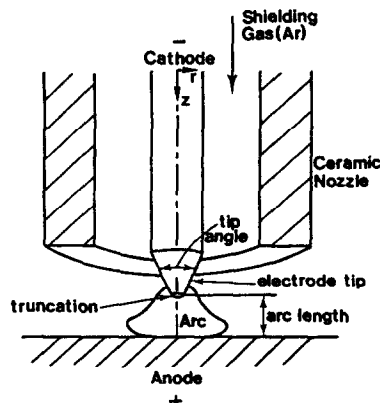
Schematic sketch of the GTA welding process.
